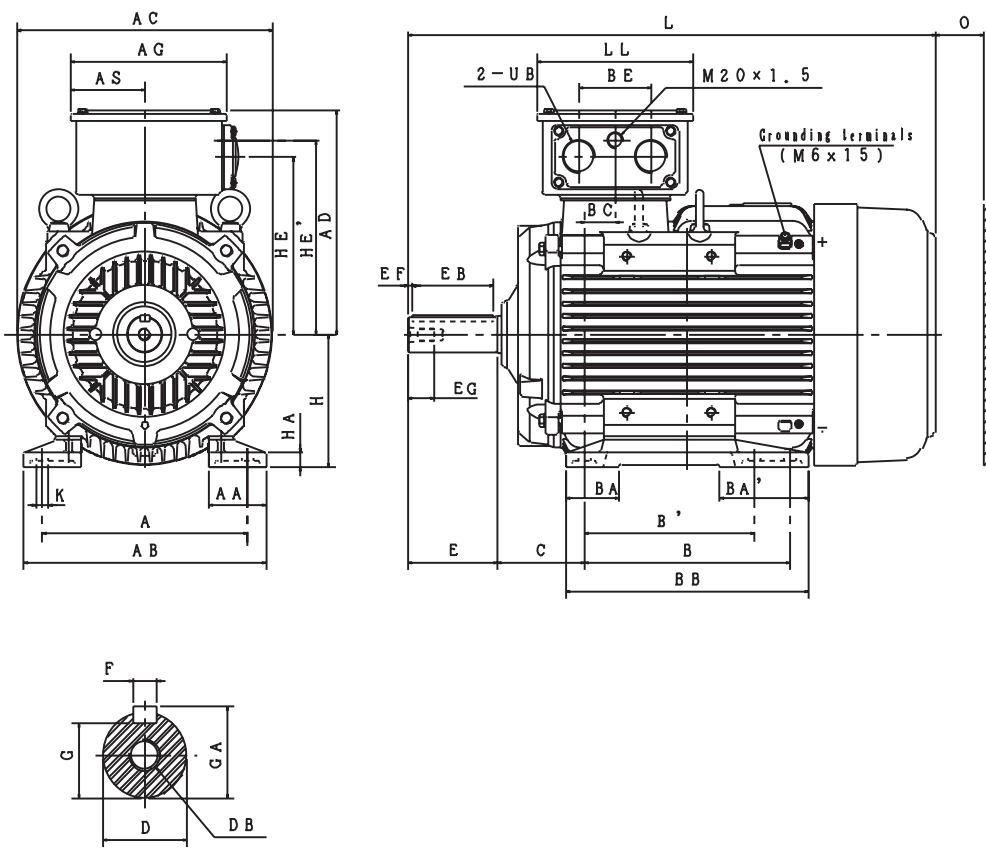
Outline drawing of cast iron design, feet version, mounting B3; frame size 200L – 250M
